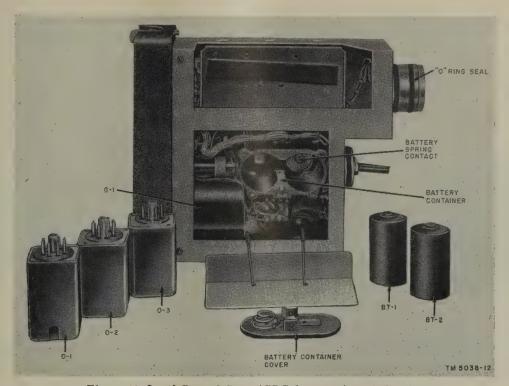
Local Control C-434/GRC, bottom view of chassis.
